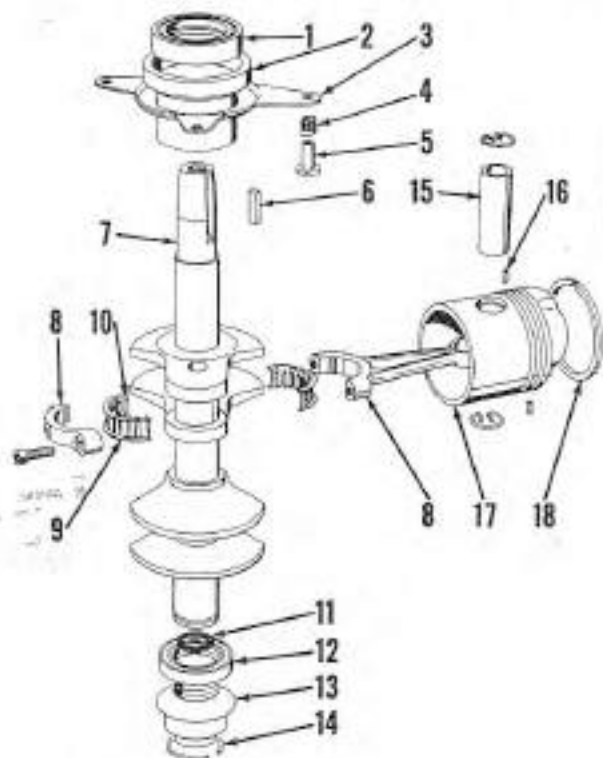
Exploded view of crankshaft, pistons and associated parts used on Fishing Scott. Refer also to Fig. Mc57.
